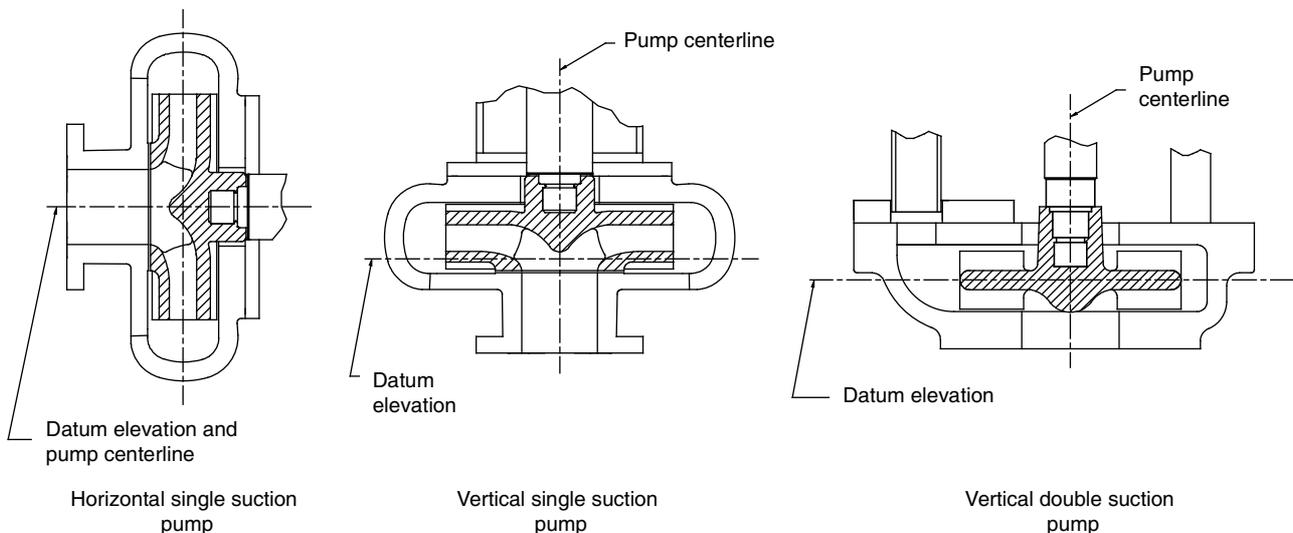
Datum elevations for various slurry pump designs
